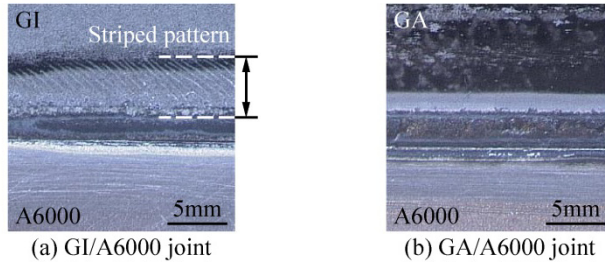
Top bead appearance of GI/A6000 and GA/A6000 Laser Roll Welded joints
